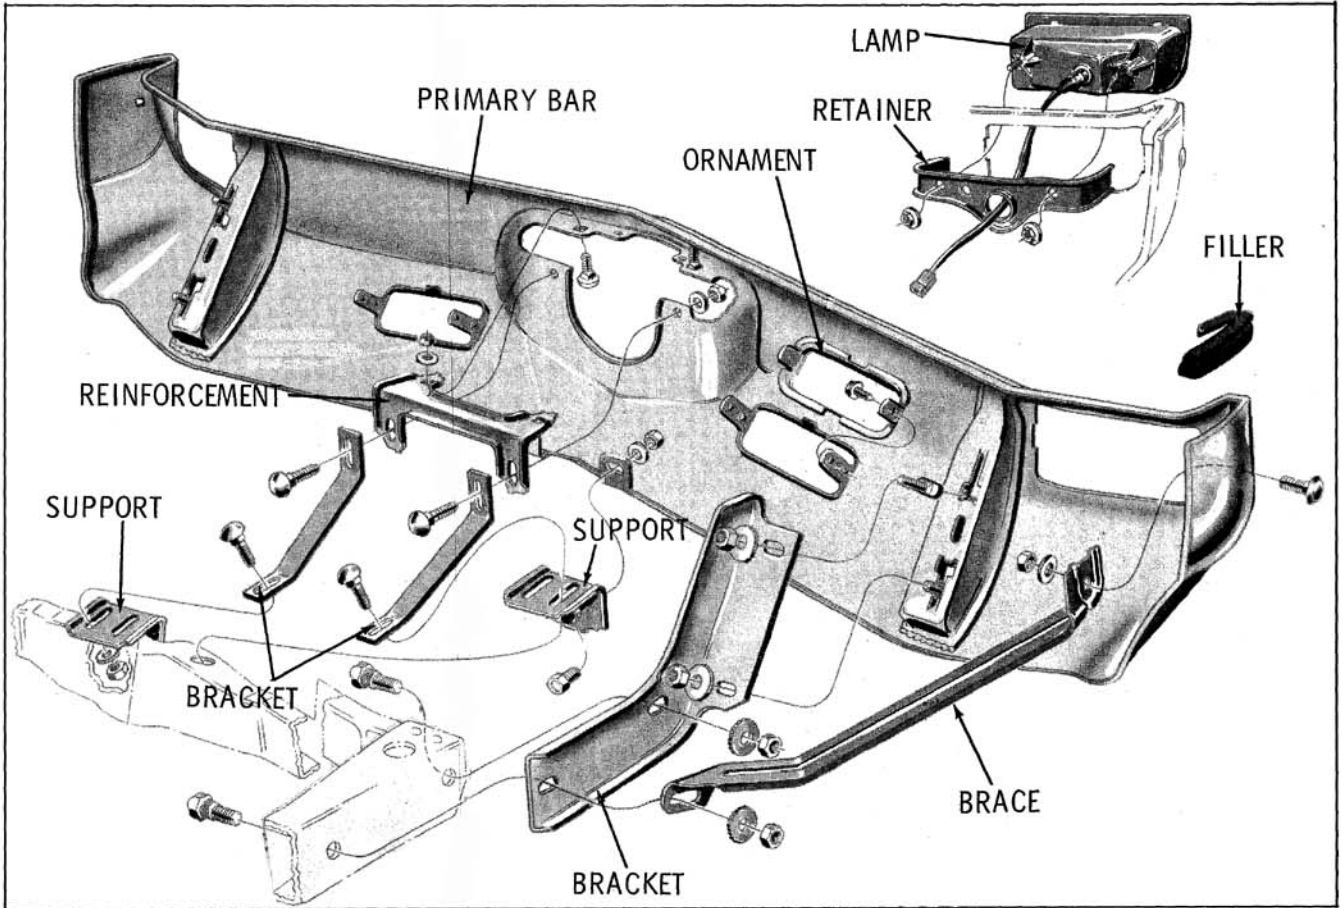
Rear Bumper (52-54-56 and 58 Series)
